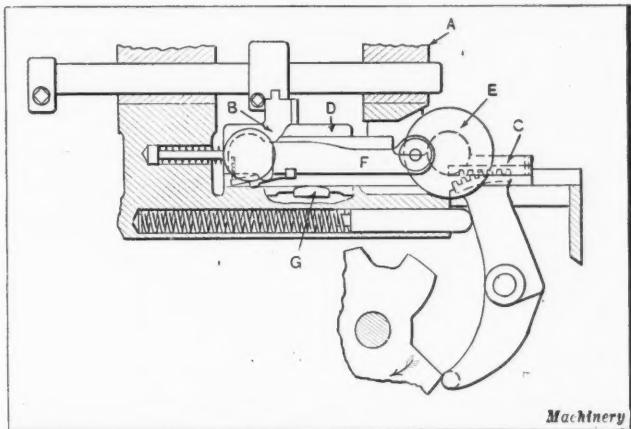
Operating Mechanism of the Auxiliary Slide carried on the Main Slide
